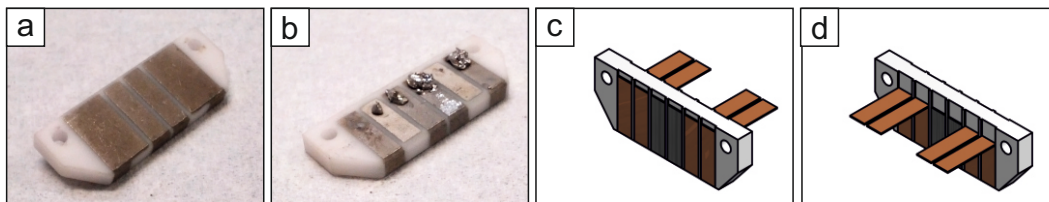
Photographs of the contact plate. The old version (a,b) was made out of Al_2O_3 with contacts deposited onto it, whereas the new one is made out of MACOR with foils pulled over the body that serve as contacts. The manipulator-side has four contacts for the old version (a), the new version has six contacts (c). At the STM-side both versions have six contacts (b,d). The foils are bent to enable spot-welding of wires to it (d).
